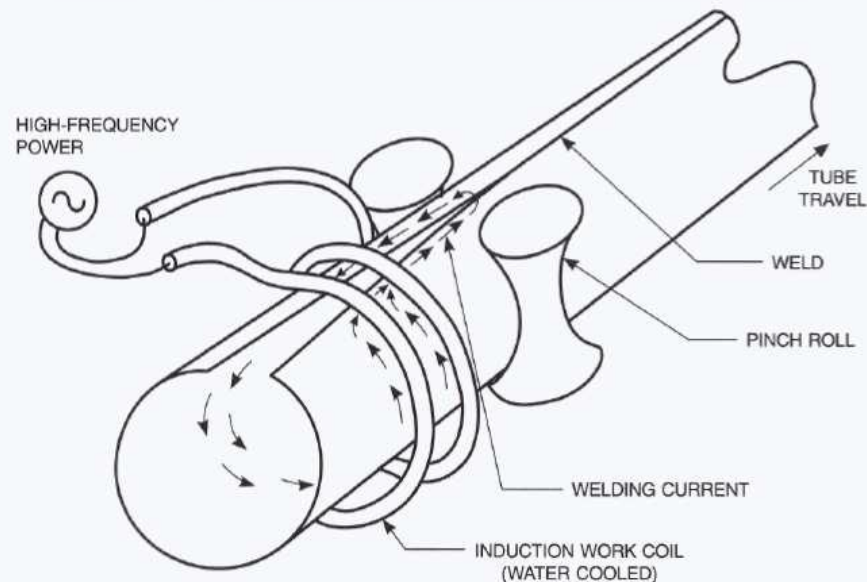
Induction Upset Welding of Tube Showing Induction Work Coil
